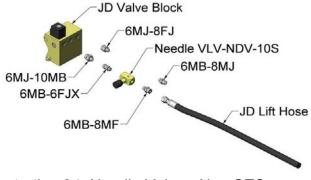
Needle Valve - Non-STC Threaded Fittings
